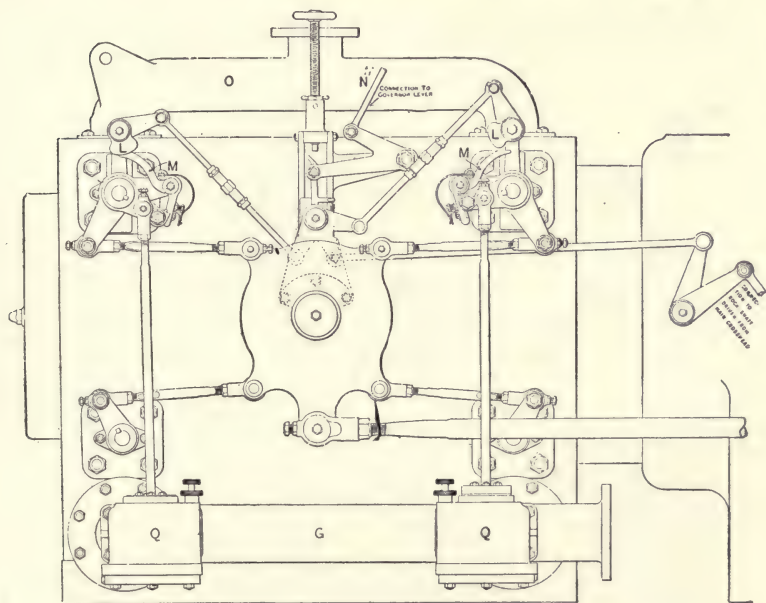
Valve Gear with Cut-off Controlled by Speed Governor.
